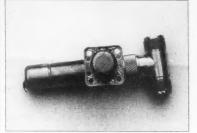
Photo B. Final assembly — gas discharge EMP arrestor and spark gap unit.
